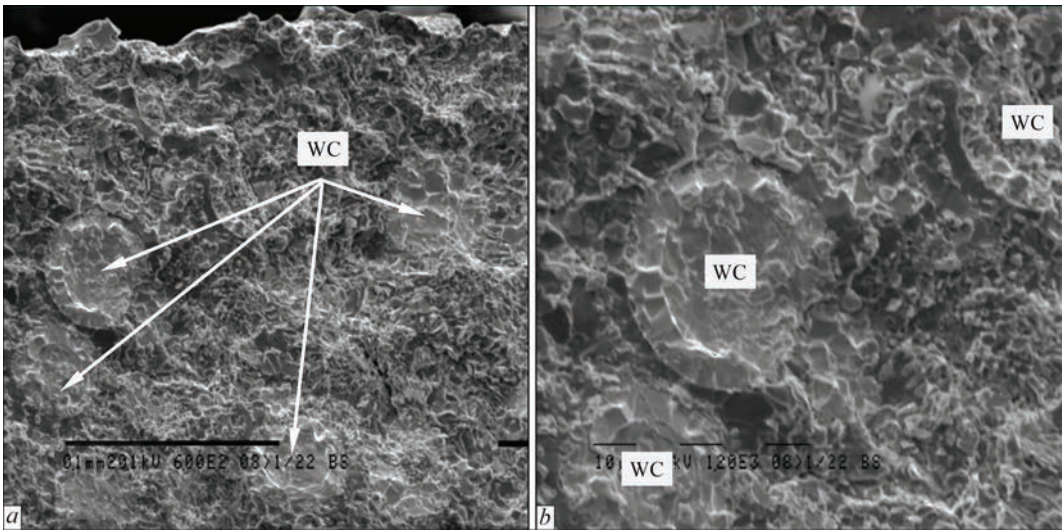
Fractograms of fracture surface of the deposit material of sample No. 6 (VT6 wire + WC powder) (*a*, ×600; *b*, ×1200)
